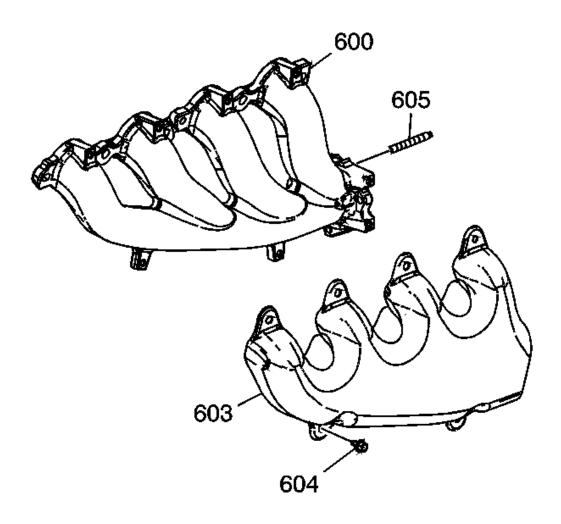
Heat Shield & Bolts Courtesy of GENERAL MOTORS CORP.
